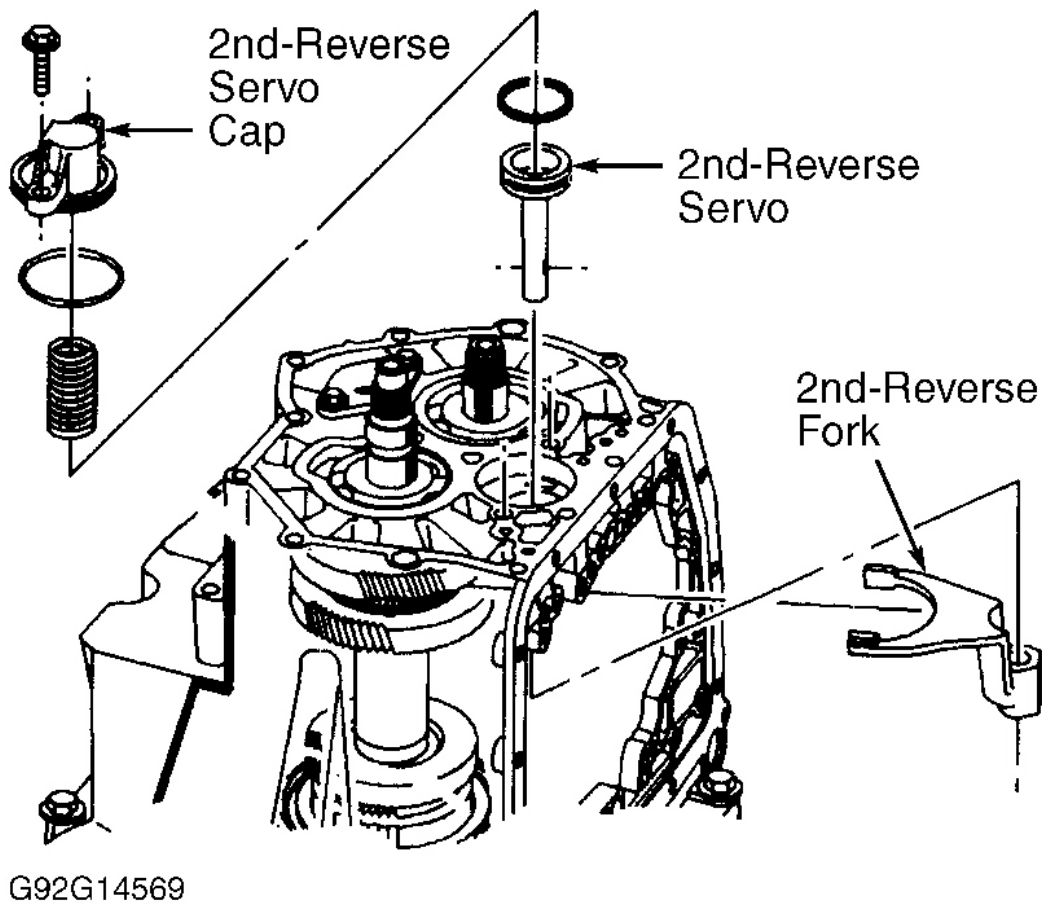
Removing & Installing 2nd/Reverse Servo & Fork Assembly
